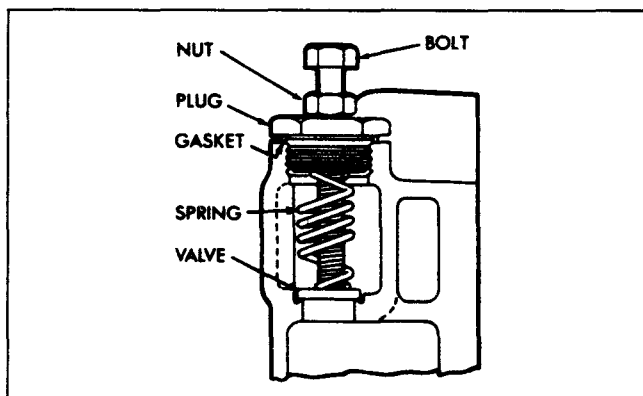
Bypass Valve with Modified Valve Plug Installed
